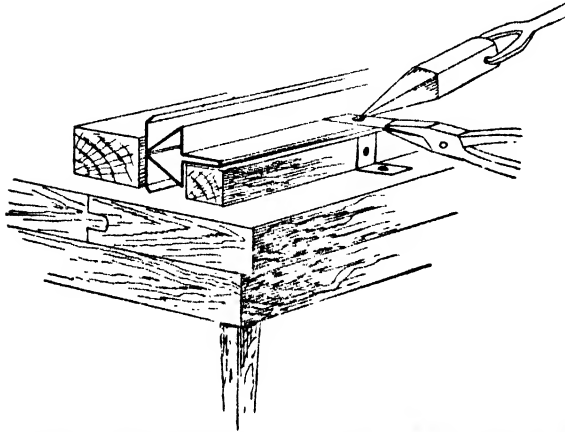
Soldering Copper Cleats in Position, Showing Gauge Mark
